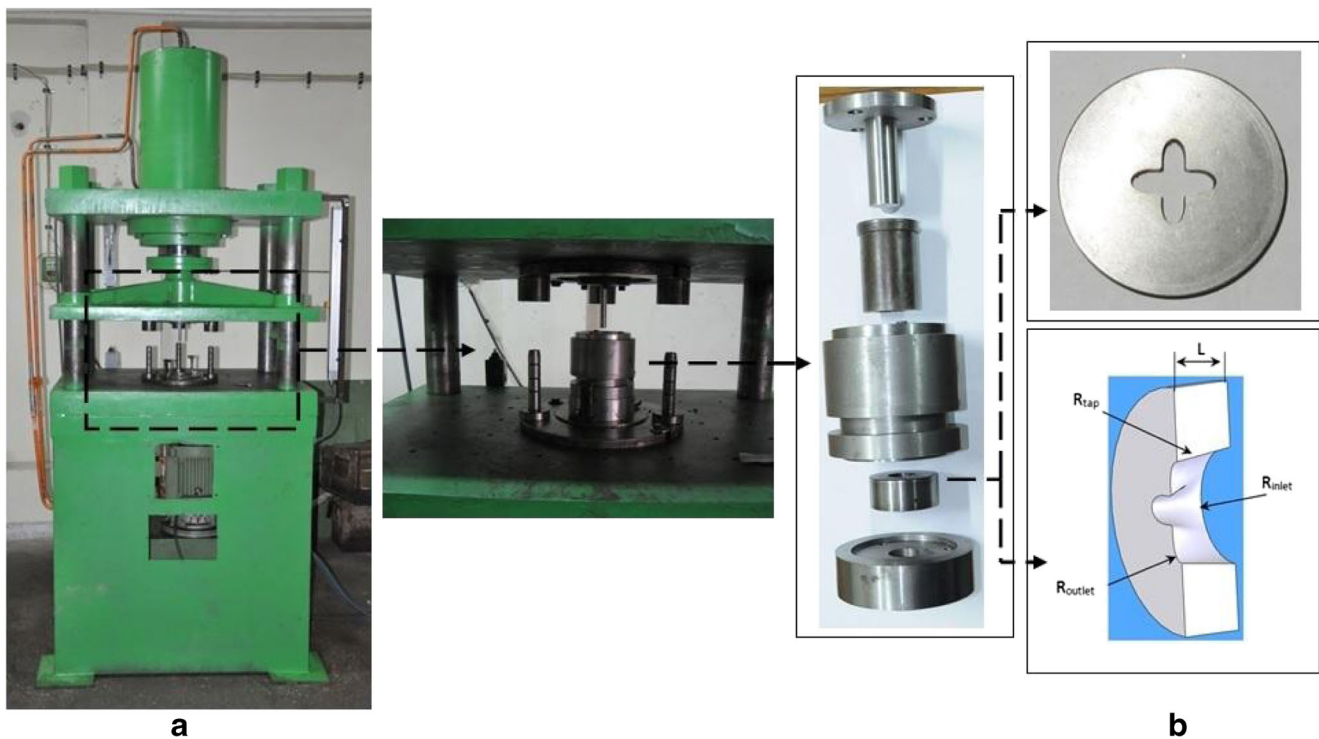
Photographic view of die assembly and schematic view of the dies a experimental set-up of die assembly; b straight tapered-four teeth die
